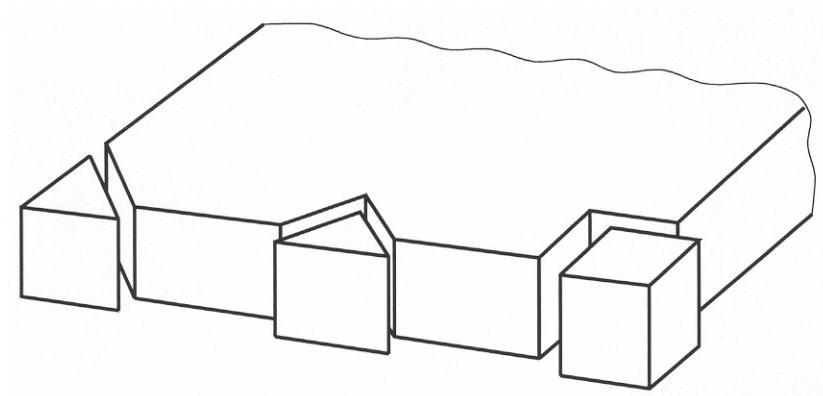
Sheet and strip (thickness ≤ 6 mm)
